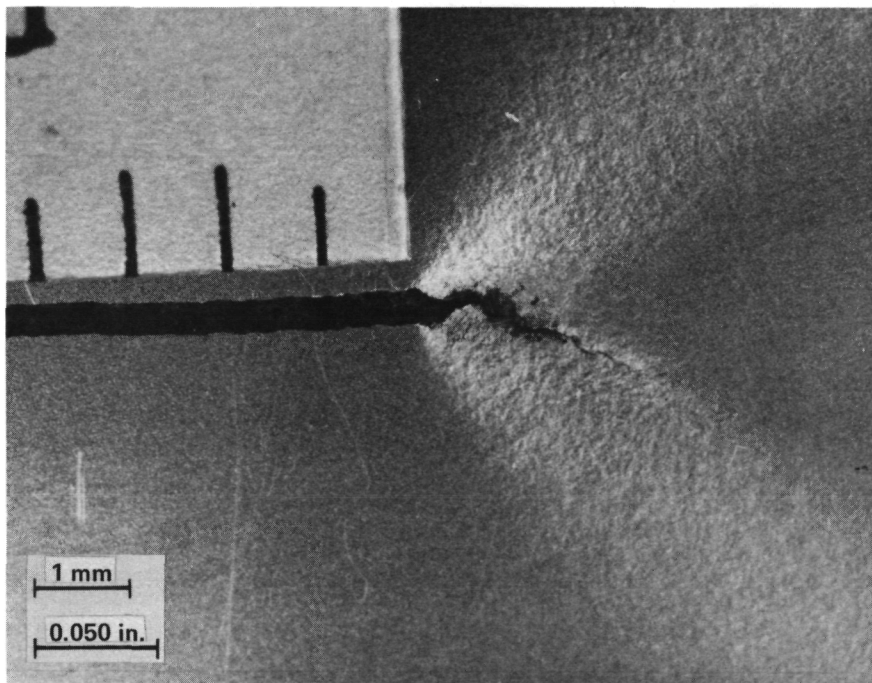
Crack Tip on Bottom Surface of Disk 21 After Test
